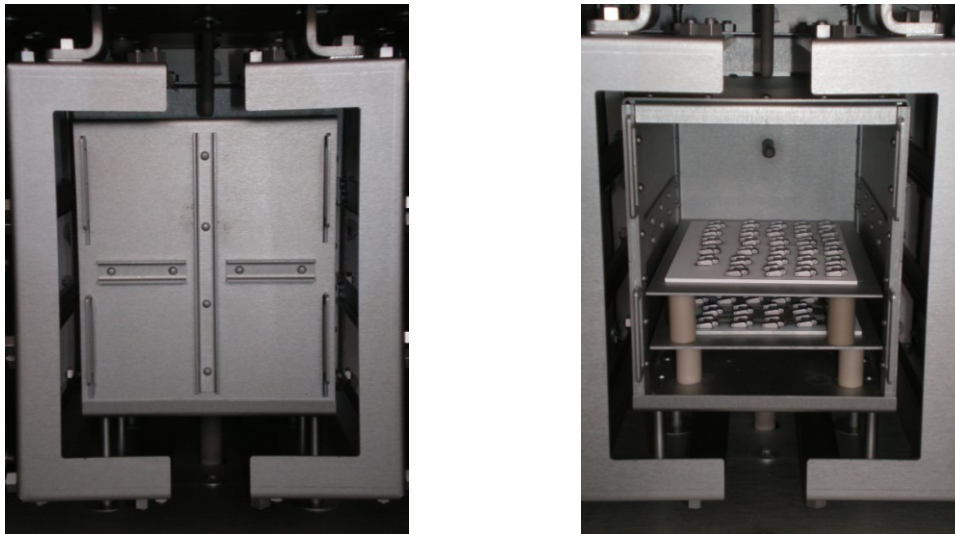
Details of the debinding and sintering furnace: (a) heating elements and debinding retort closed, (b) sintered watch bracelet segments on zirconia coated alumina support, placed on molybdenum plates inside the retort.
